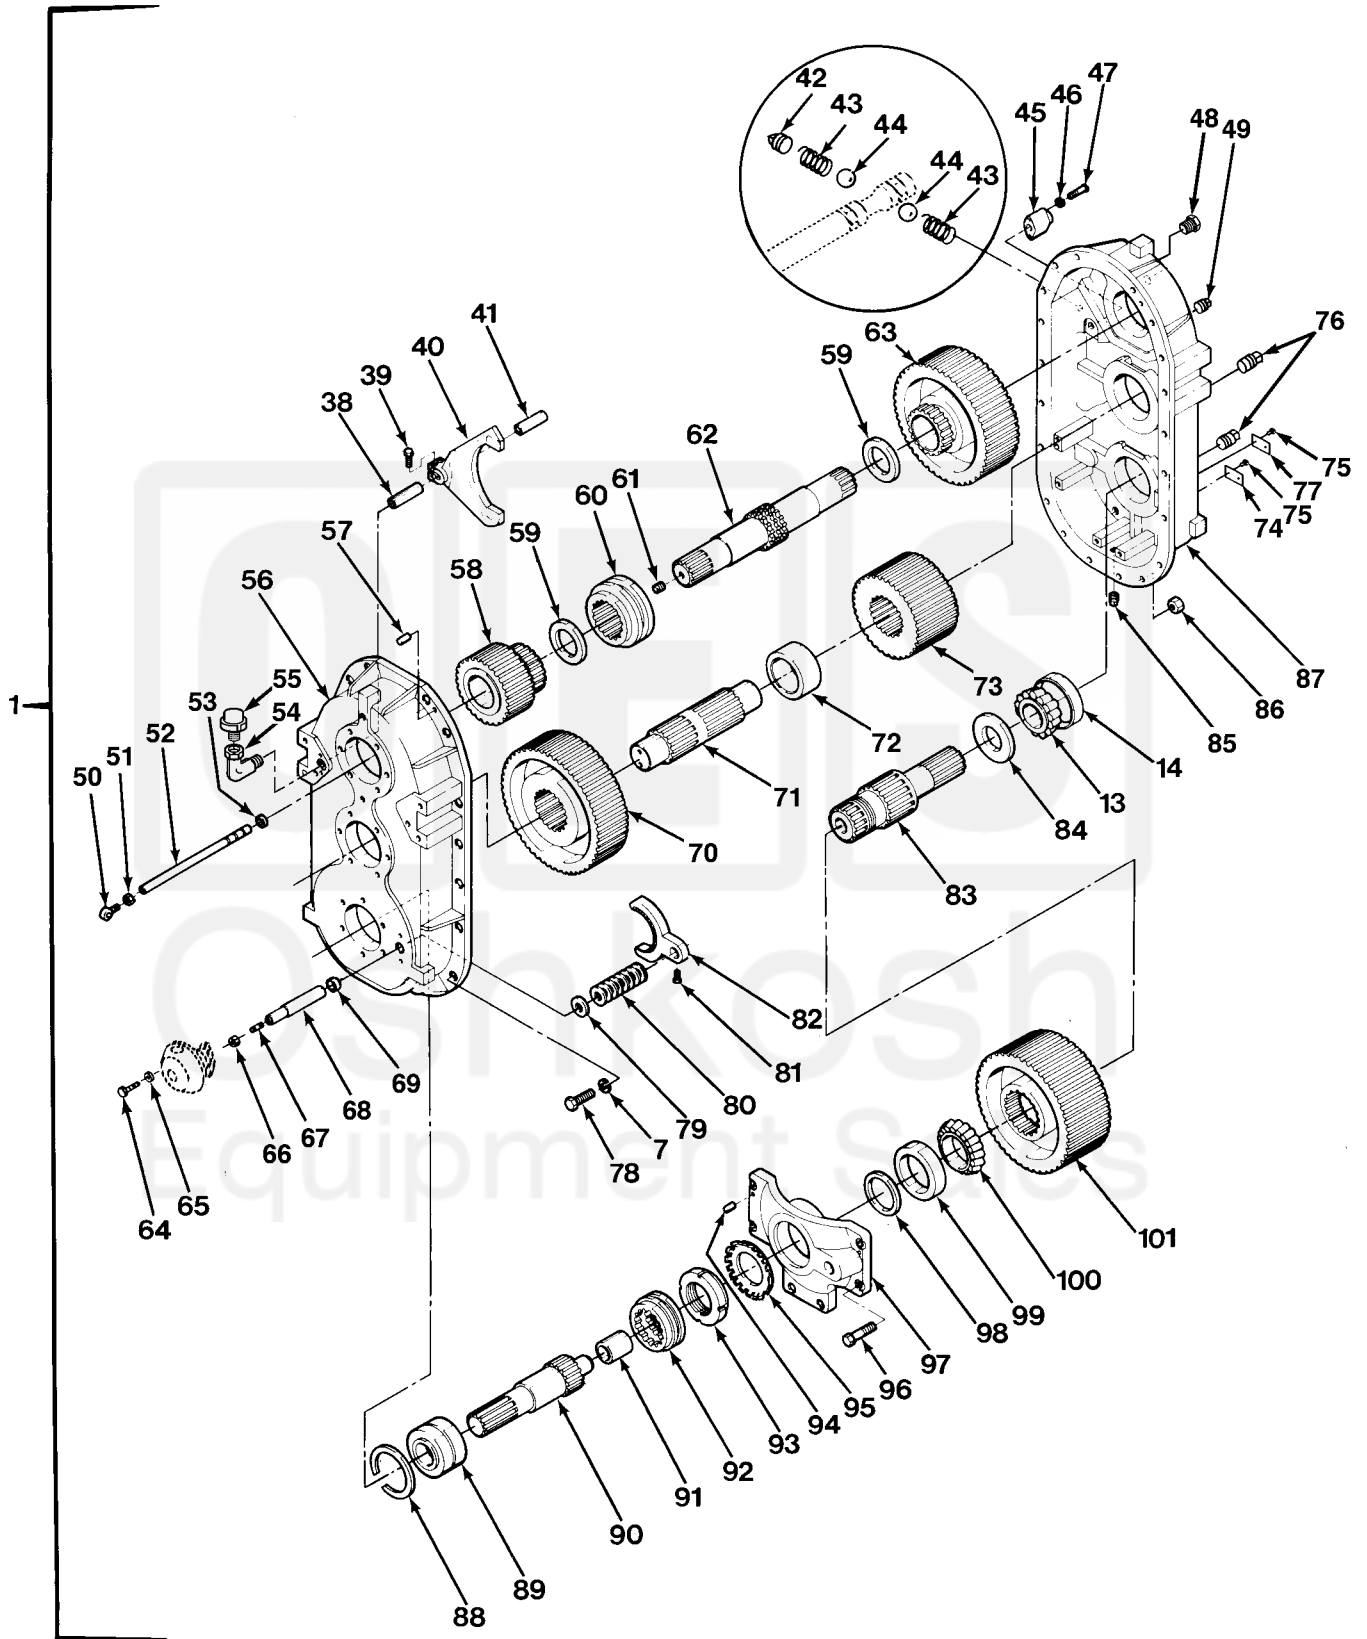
TRANSFER CASE ASSEMBLY (SHEET 2 OF 2)
